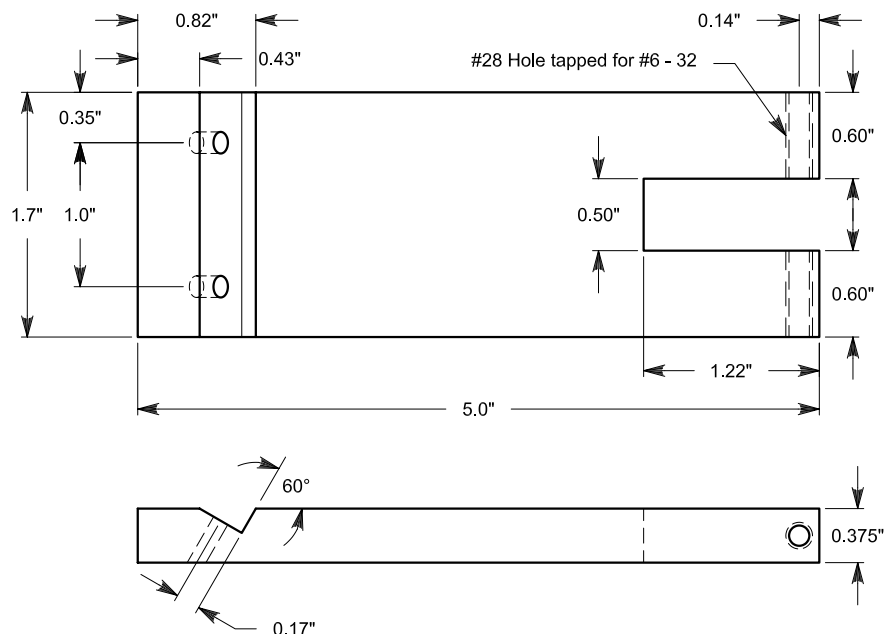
Dimensions of the polycarbonate feed mounting plate.
